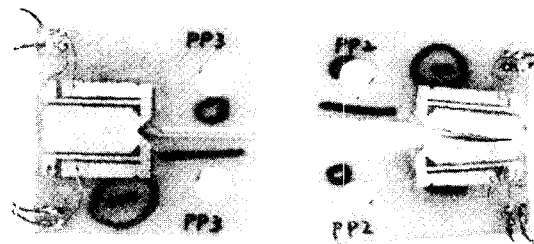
Fatigue crack specimen instrumented with the KRAK-gage
